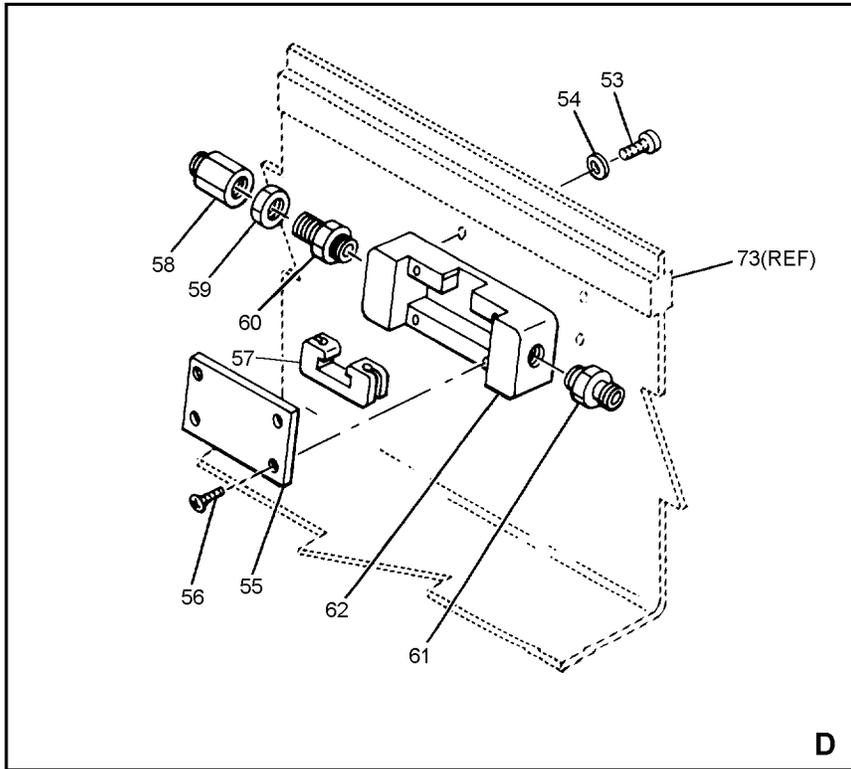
Lower Container Assembly (RSSK-8D) (Sheet 2 of 3)
